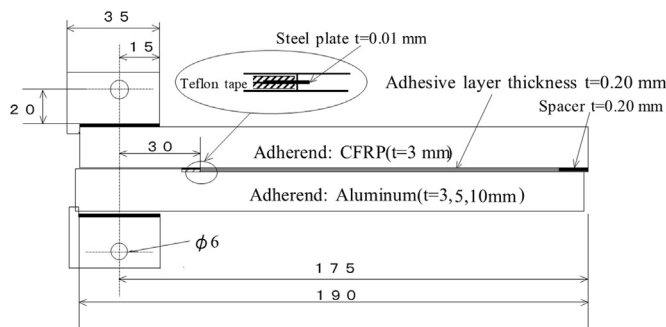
Shape and dimensions of the adhesively bonded DCB joints.
